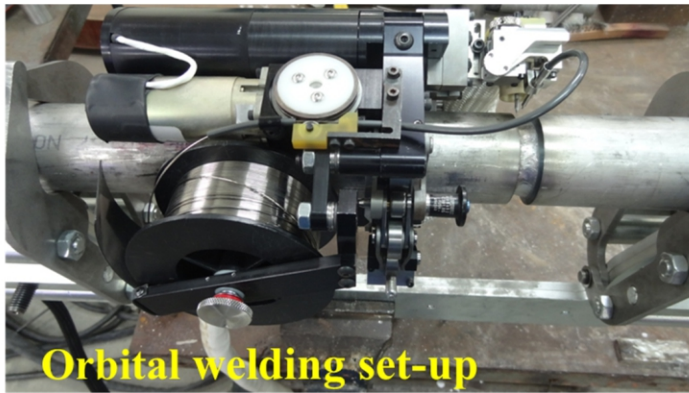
Orbital TIG welding of 304HCu and Alloy 617M tubes
